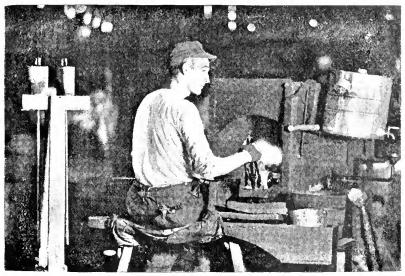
A VIEW OF THE GAFFER AT WORK, SHOWING HIS TOOL AND MANNER OF HOLDING THE BOTTLE WHEN FORMING ITS NECK.
